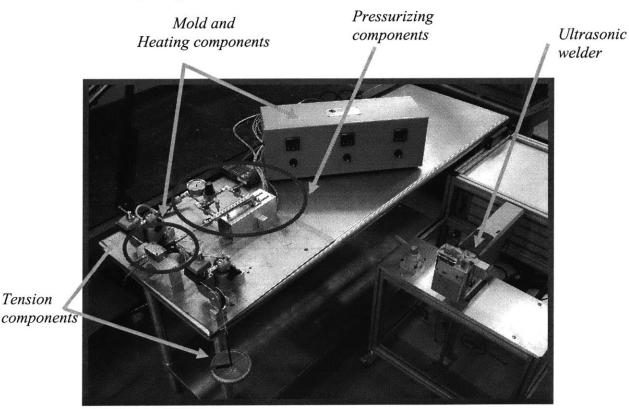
The main components involved in splicing: the welder, mold, tension components, pressurizing components, and heating components.
